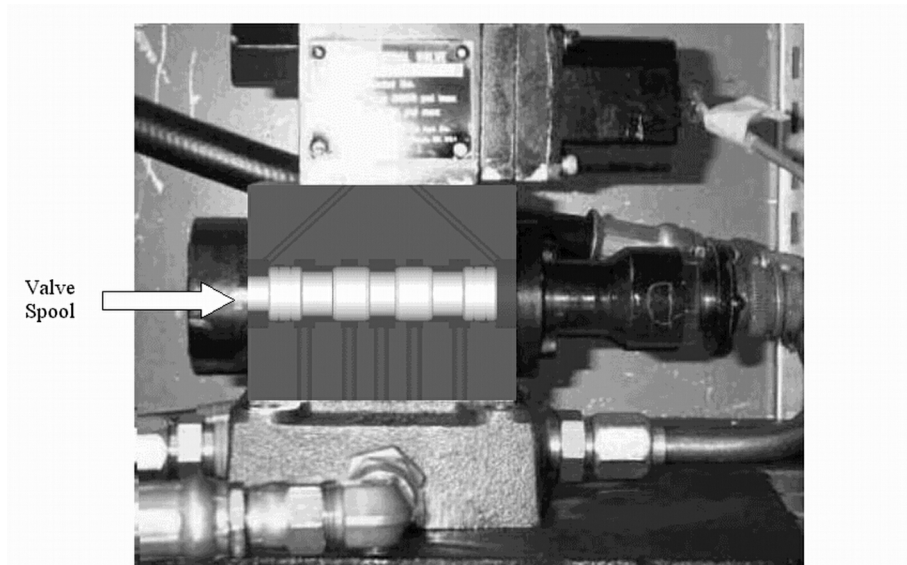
Cutaway view of the main stage to show location of valve spool.
